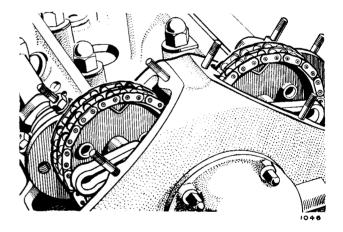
Showing the camshaft sprockets disconnected from the camshafts.
